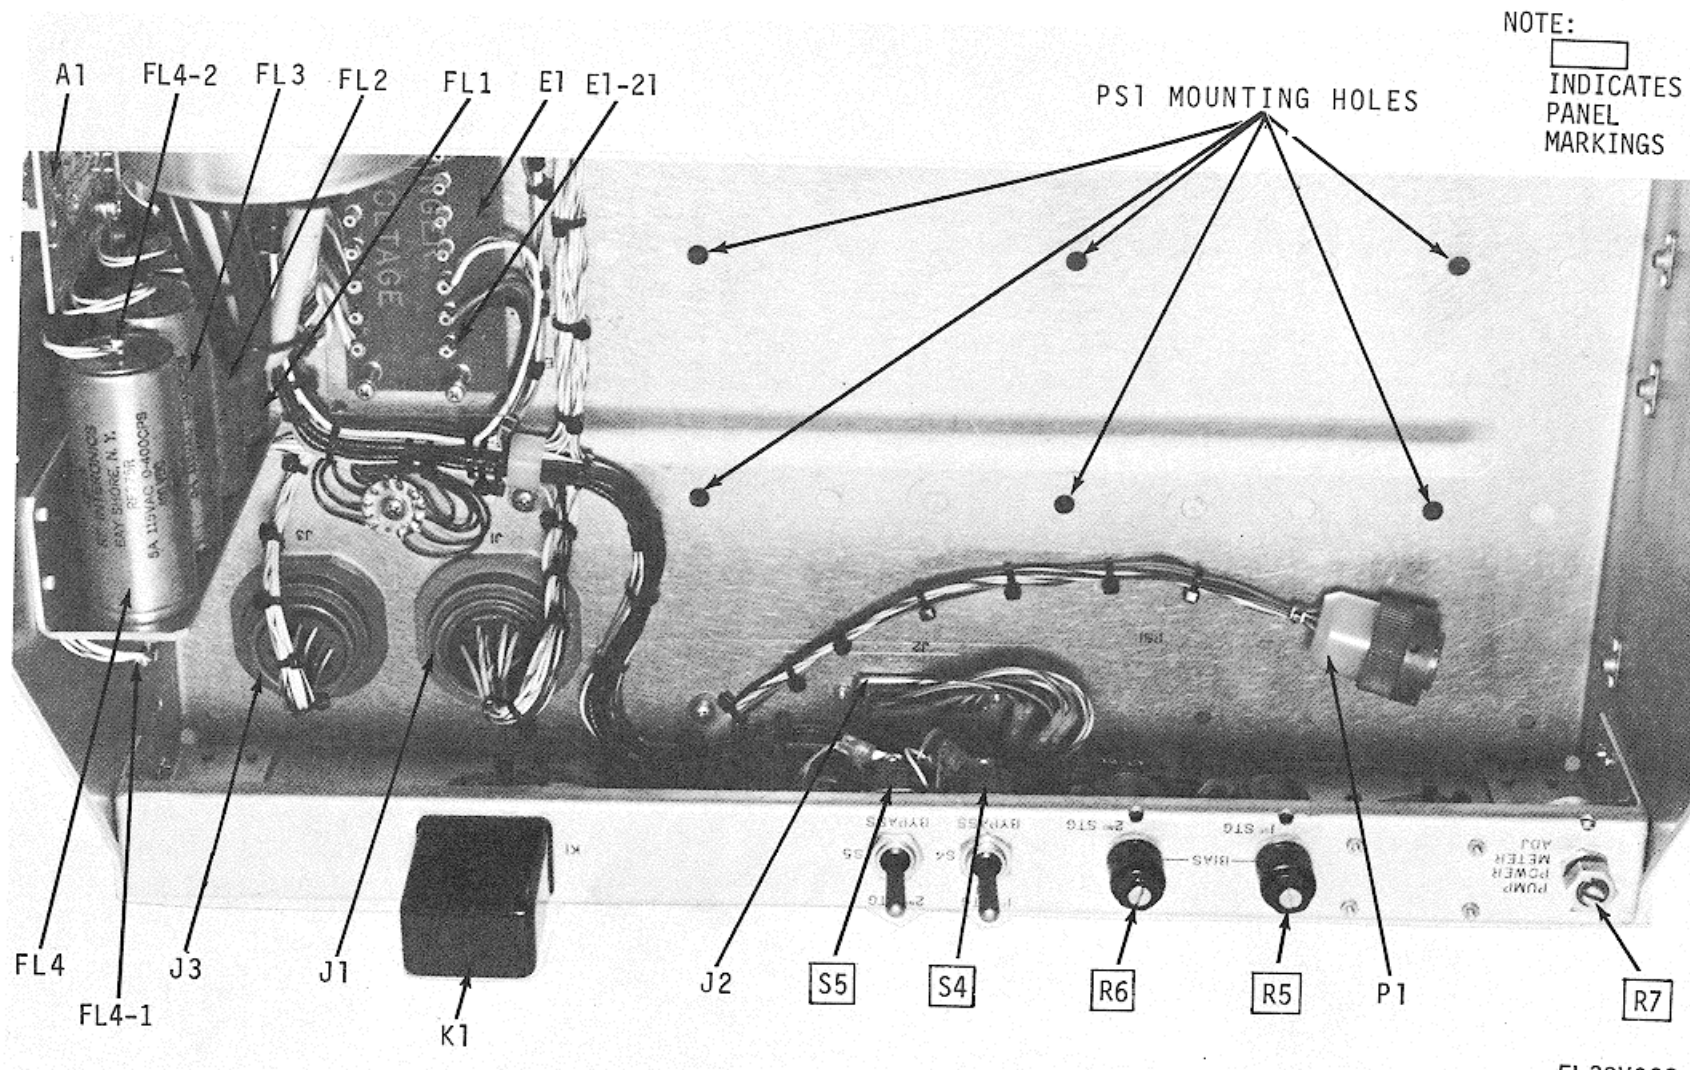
Unit 1 Parts Layout, rear of Chassis View.
